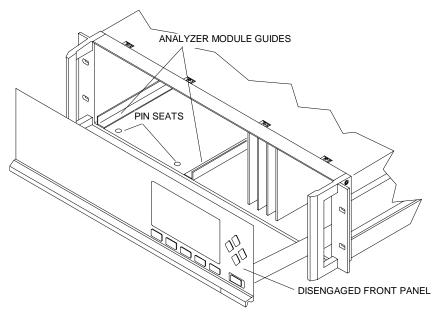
Analyzer Module Installation Into Instrument Platform
